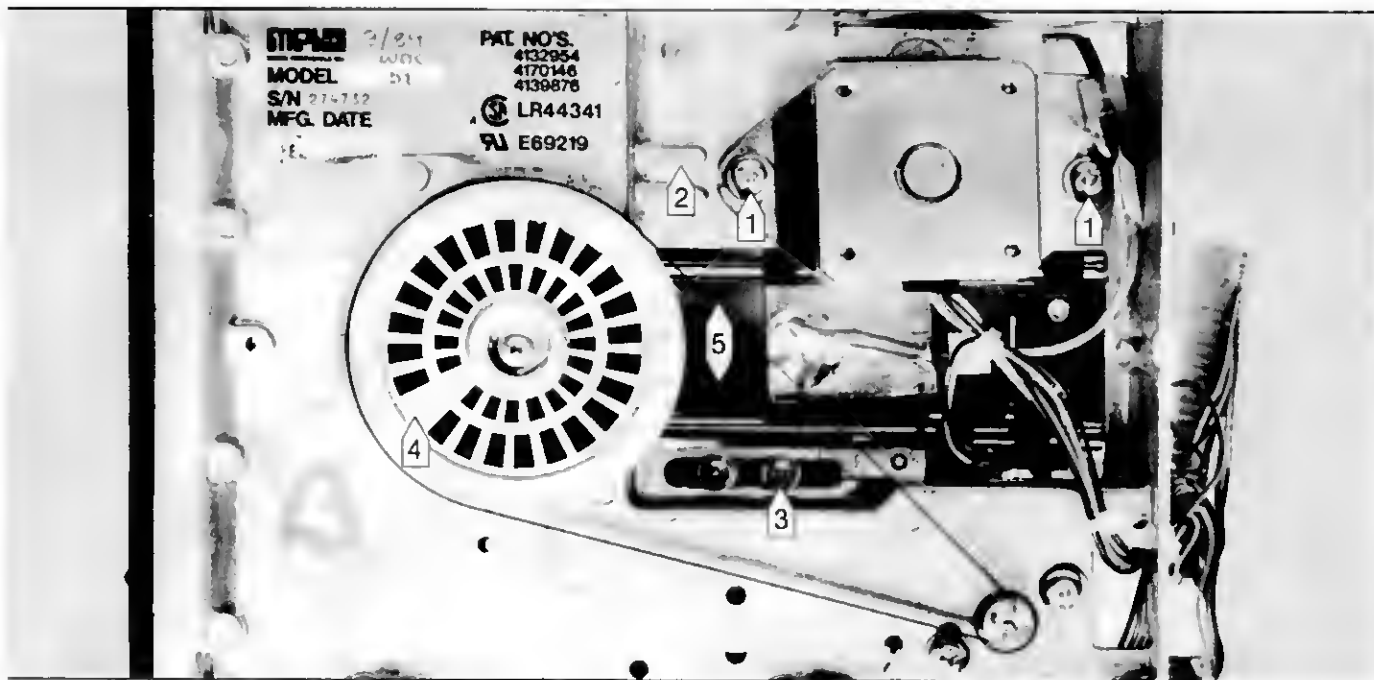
Bottom view of a Micro Peripherals Inc. drive. (1) Head stepper motor mounting screws. (2) Notches for screw driver to align head. (3) Track zero detector adjustment. (4) Strobe disk. (5) Head rails.
